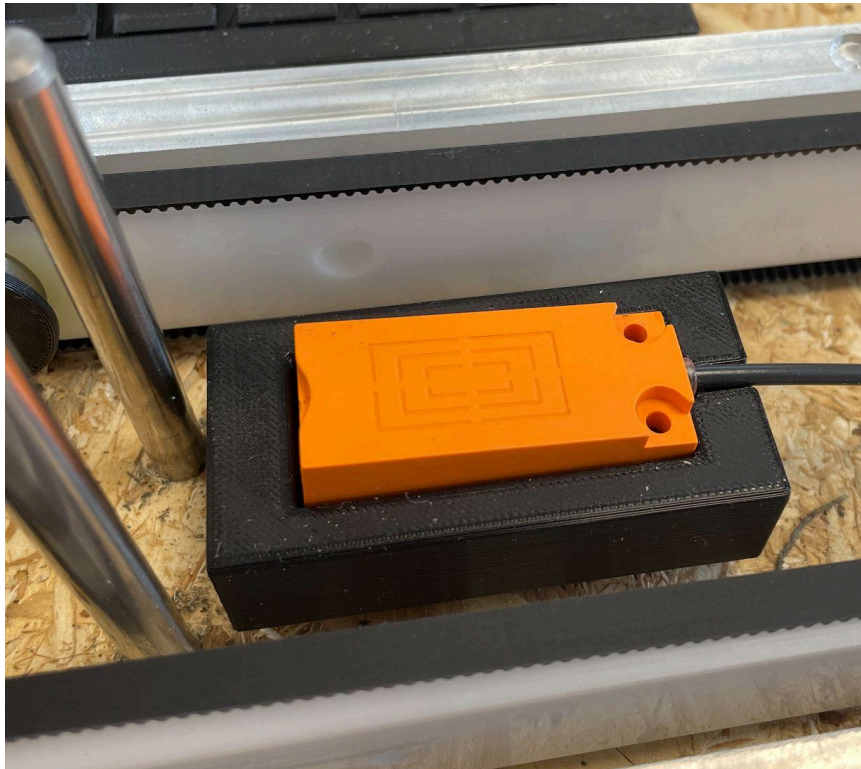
Capacitive sensor mounted under the conveyor in its 3D-printed housing.
